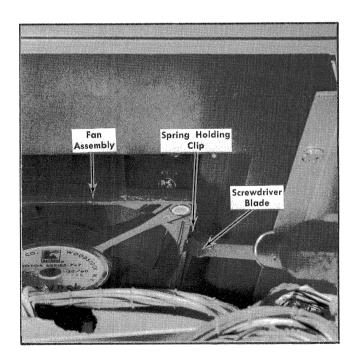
Interior view, showing screwdriver inserted between Fan Assembly and holding clip.
